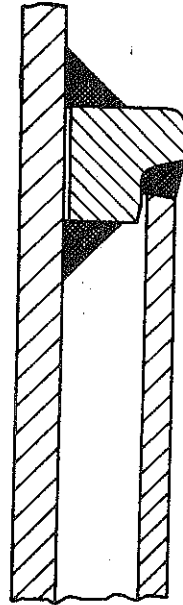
Plain jacket welded to shell by ring
